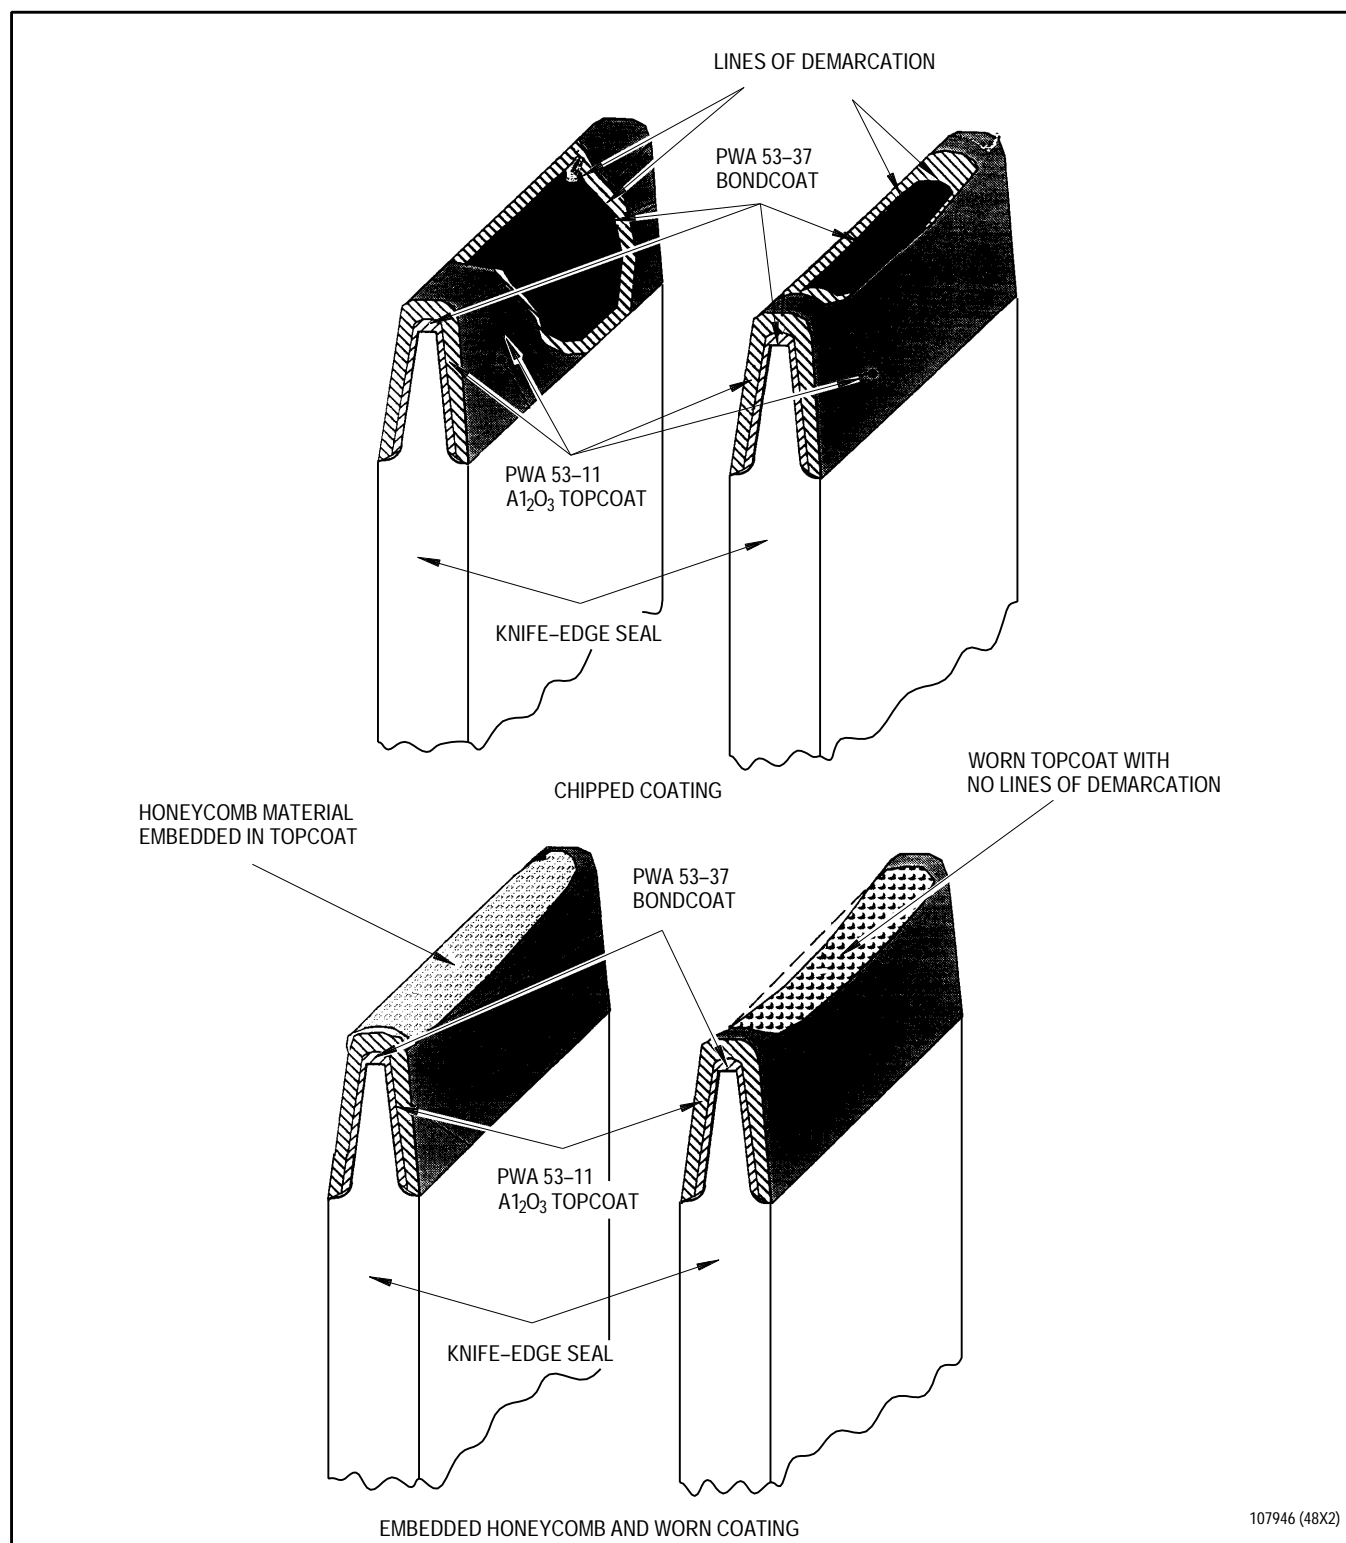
Seventh Through Thirteenth Stage Rear Compressor Disk-Drum Rotor Assembly - Chipped Coating, Embedded Honeycomb and Worn Coating
